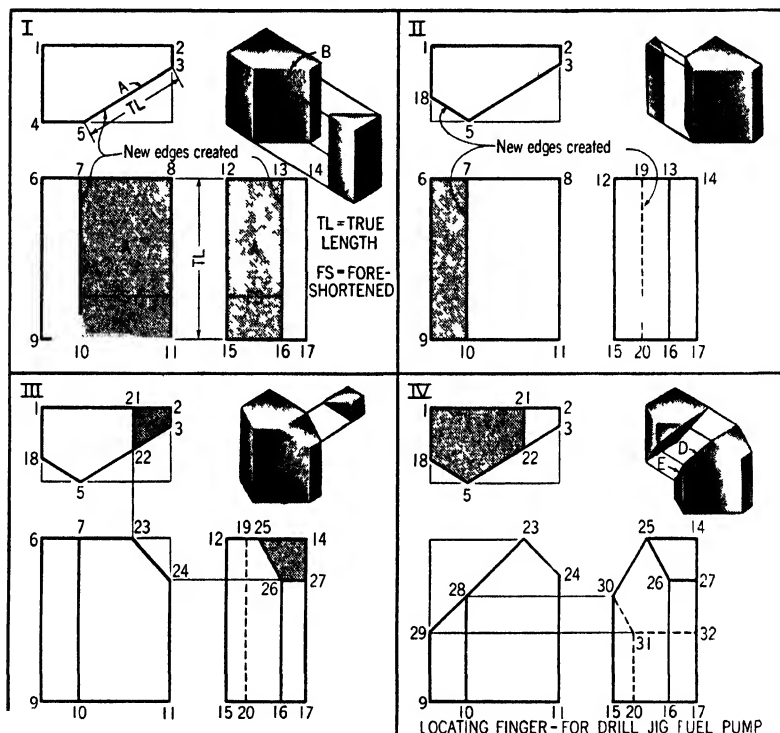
MACHINING A "LOCATING FINGER" — INCLINED SURFACES
